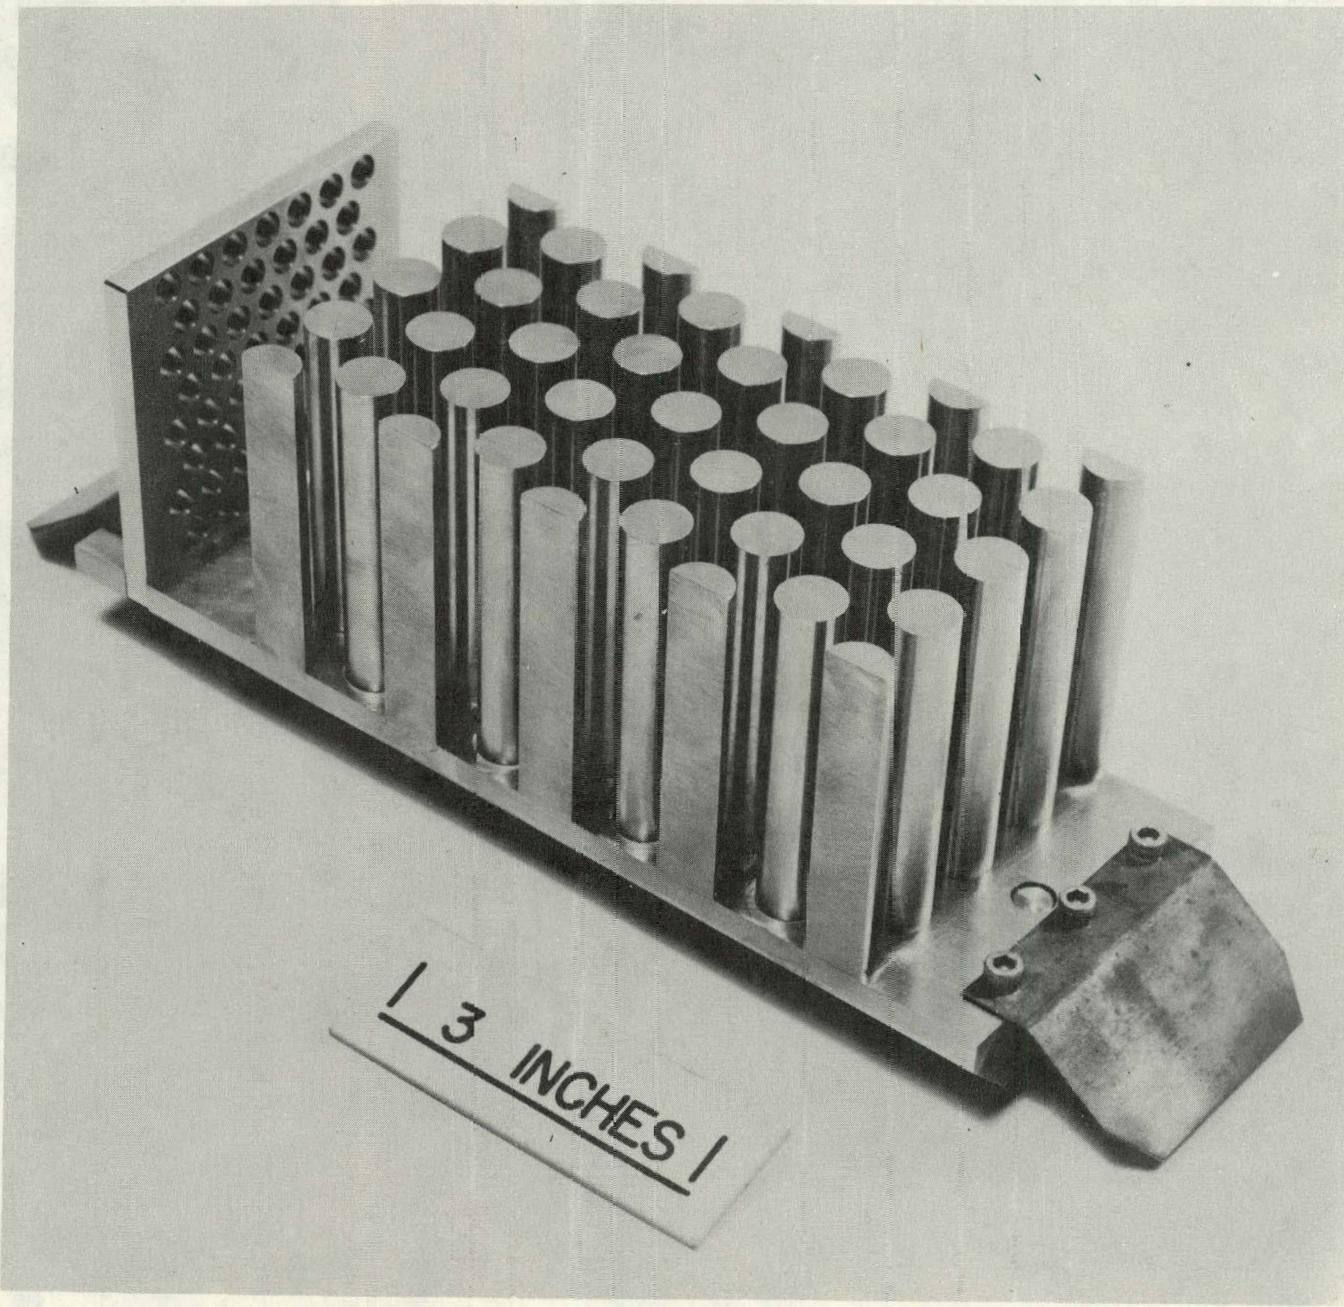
Photograph of Horizontal Tube Bundle before Assembly
